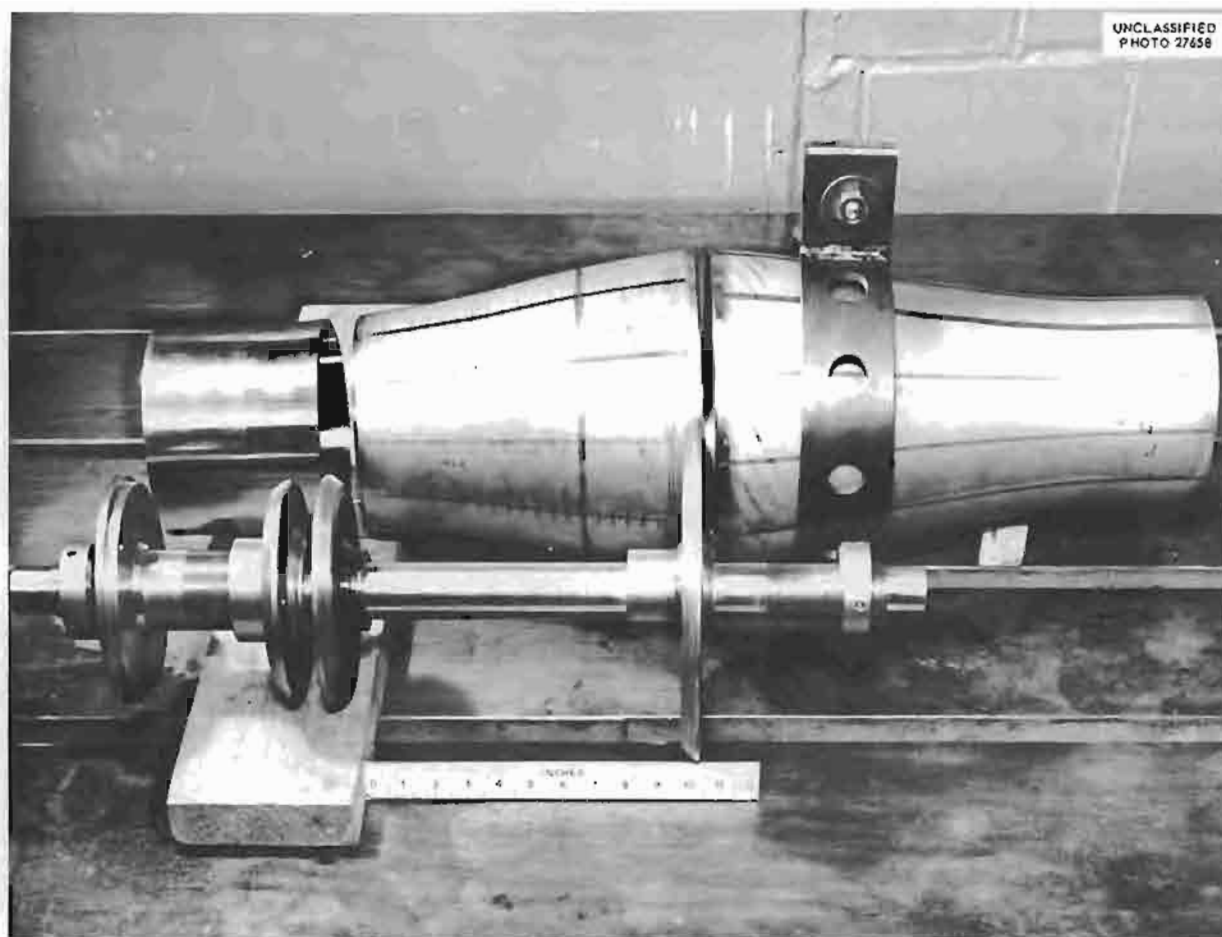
Inner Fuel Annulus Core Shell and Welding Fixture.
